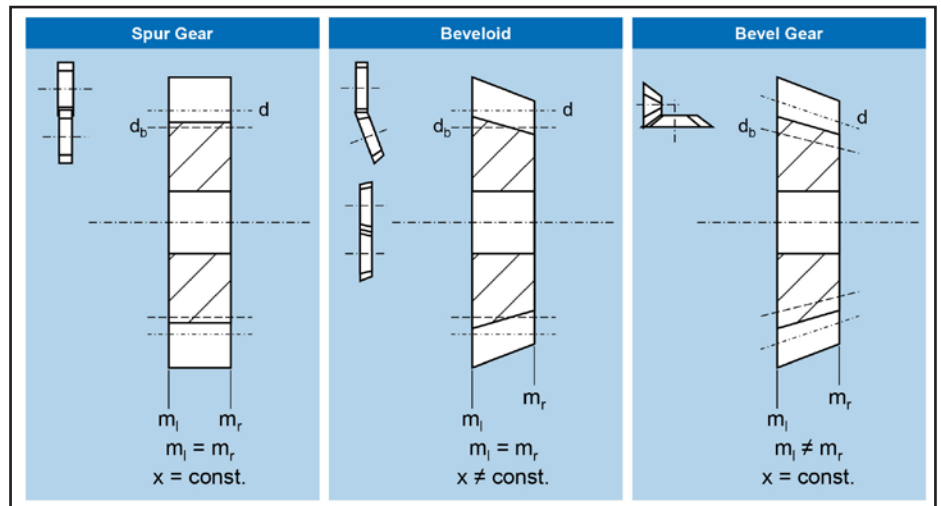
Geometrical characteristics of beveloid gears (Ref. 2).
